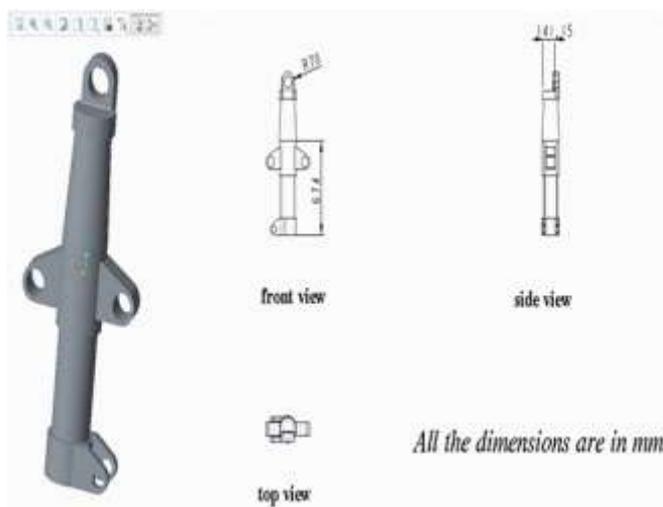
CAD model (left) and Oleo cylinder detailed drawing (right)
